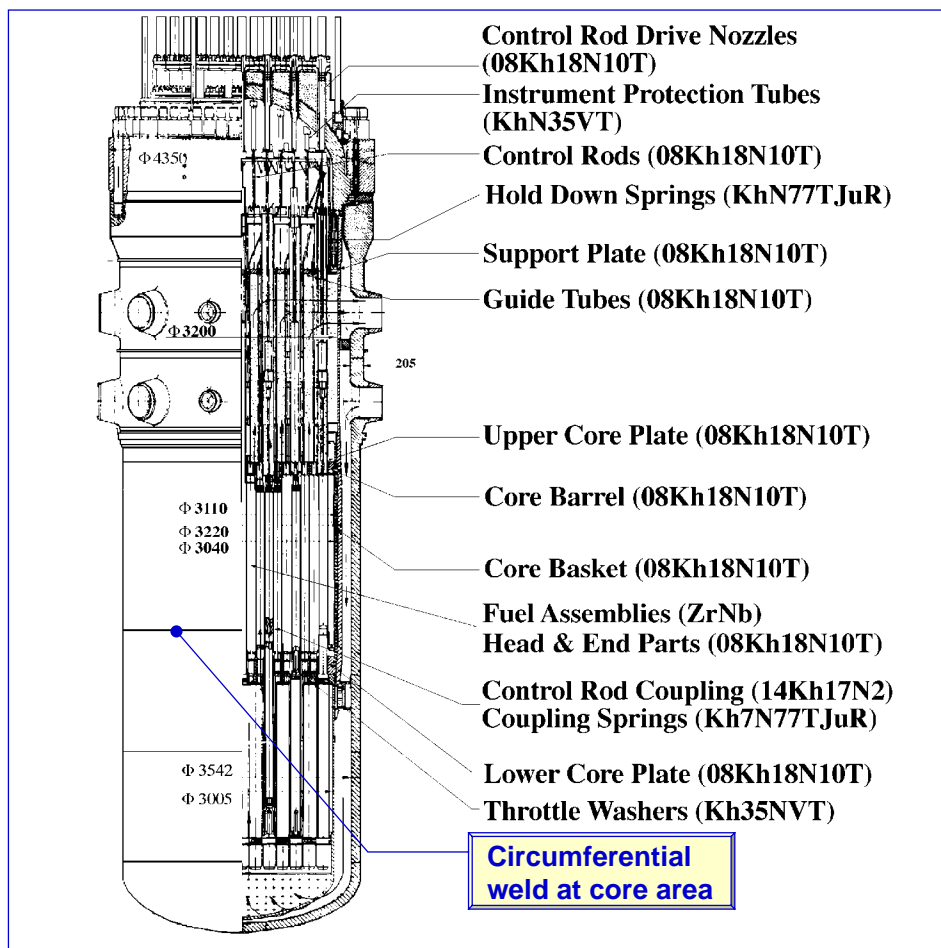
VVER 440 Reactor pressure vessel and location of the critical weld.
